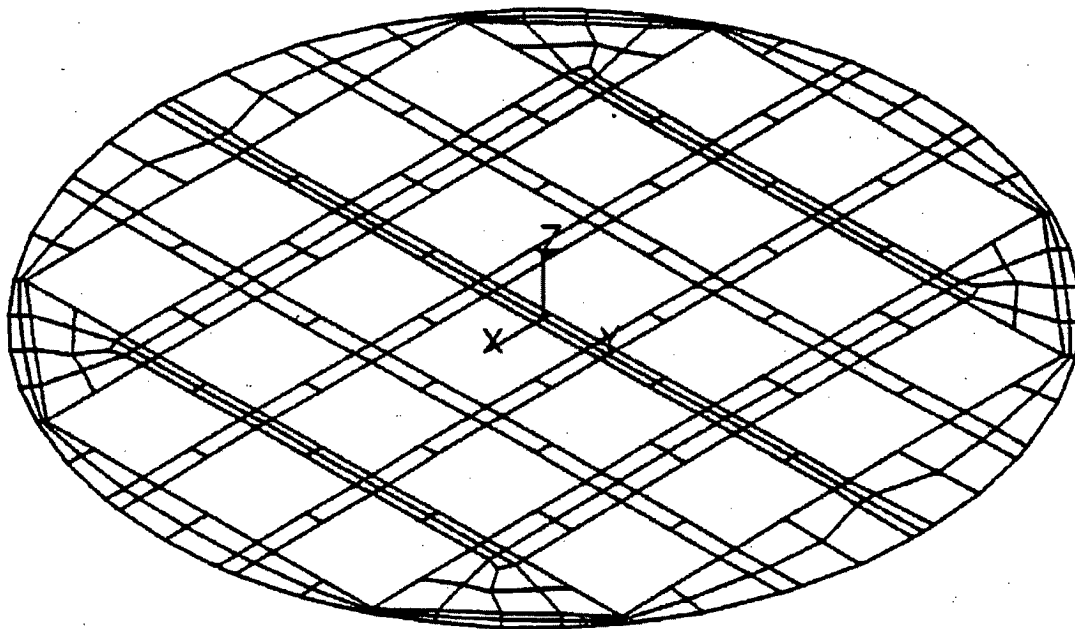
Fuel Basket Top Weldment Boundary Conditions (Directly Loaded Fuel Configuration)
